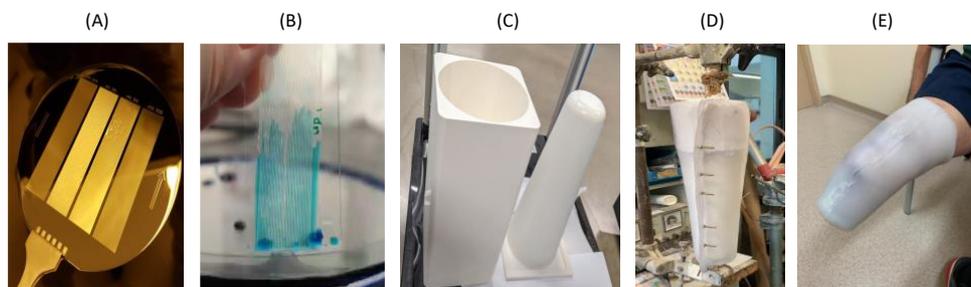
Development of microchannel liner. (A) Master mould of various channel dimensions, (B) Demonstration of capillary action, (C) 3D printed mould, (D) Injection moulding process, (E) Final liner on user.
